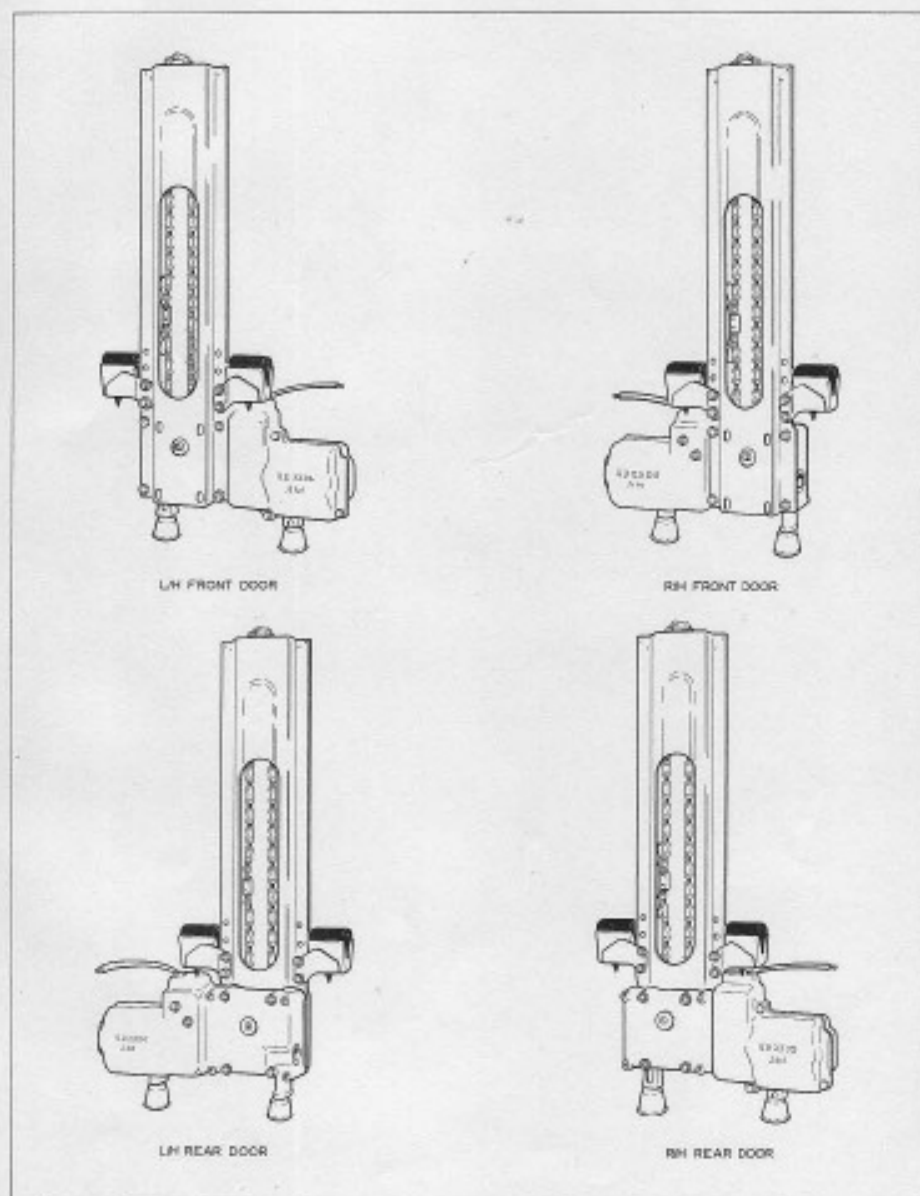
Motor and mechanism assembly showing the positions of mounting for all four doors.
